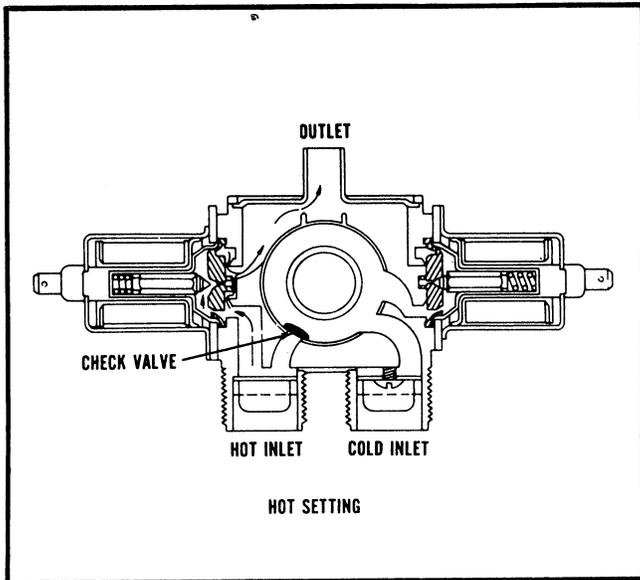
Non-Thermostatic Valve — “Hot” Setting
